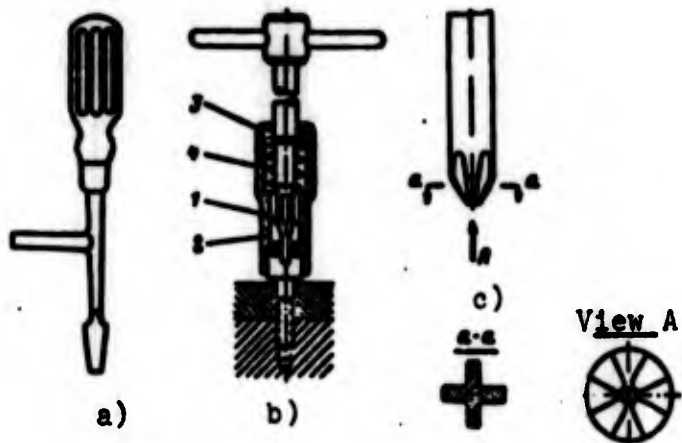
Special screwdrivers: a) screwdriver with tap wrench; b) screwdriver with guide; c) screwdriver for cross-shaped grooves; 1 - screwdriver; 2 - guide bushing; 3 - check ring; 4 - spring.
